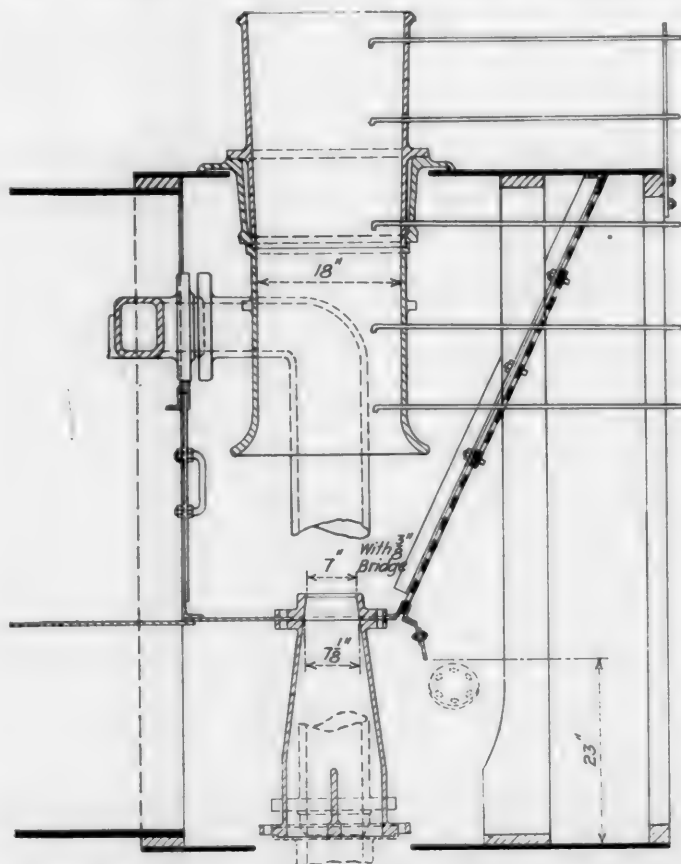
The Original Front End Arrangement of the N. & W. Mountain Type Locomotives
